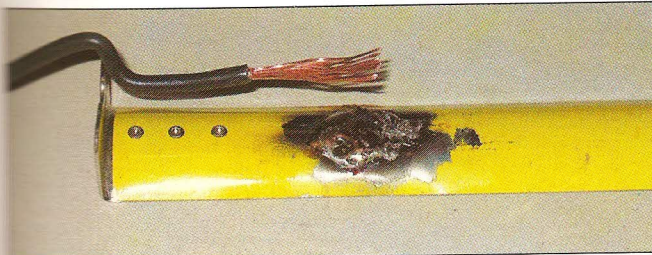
Stranded hookup wire, #14 AWG, flattened out ready for soldering.
